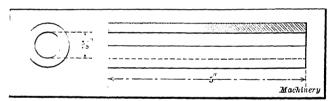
Machine-steel Piston-pin drilled with Compressed
